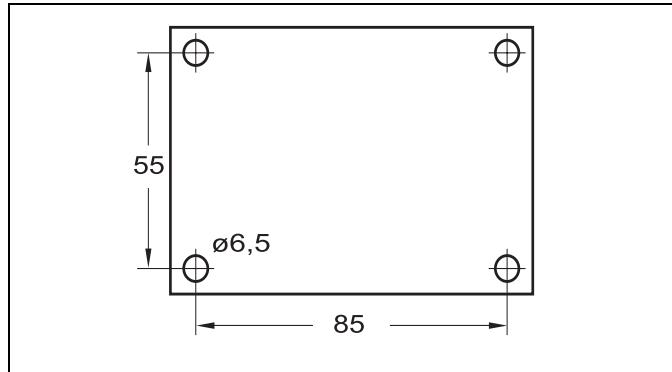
Hole pattern for the stand for the U 4855 circulating pump
